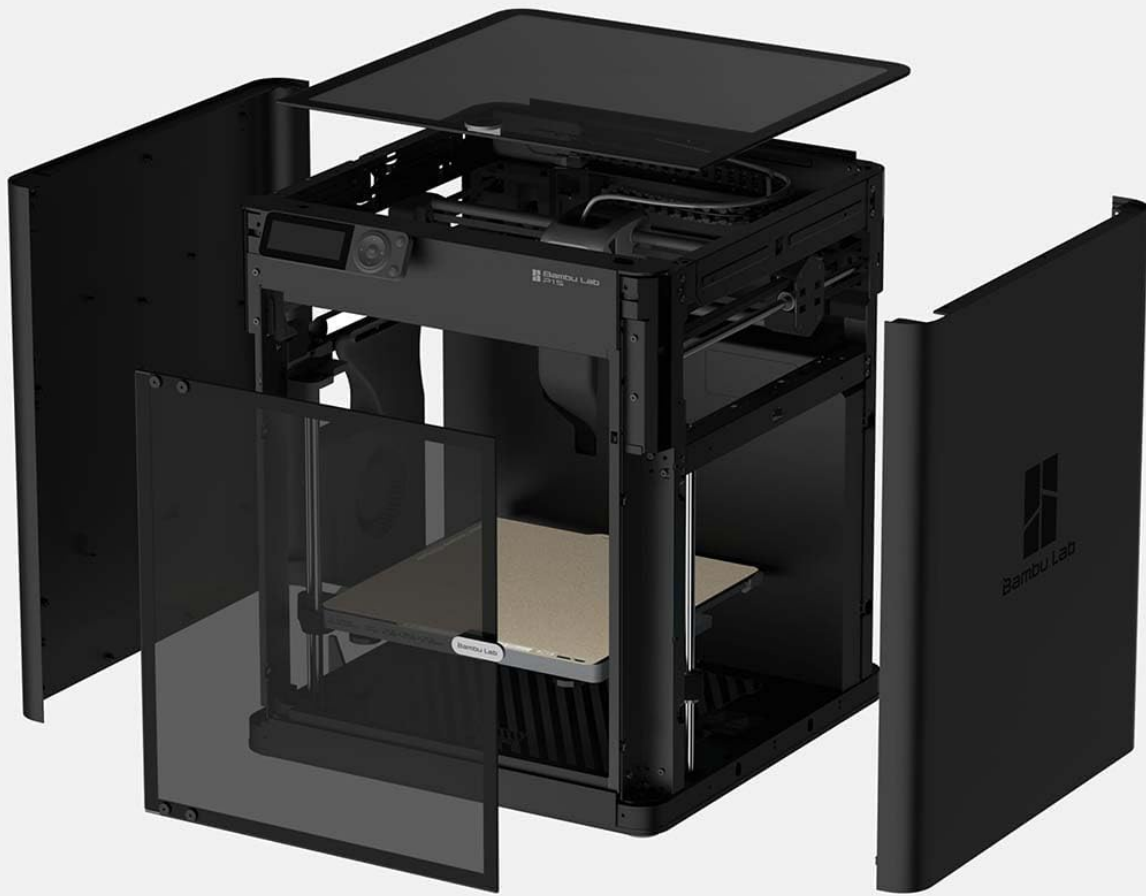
Exploded view showing the internal components and enclosure of the P1S.
